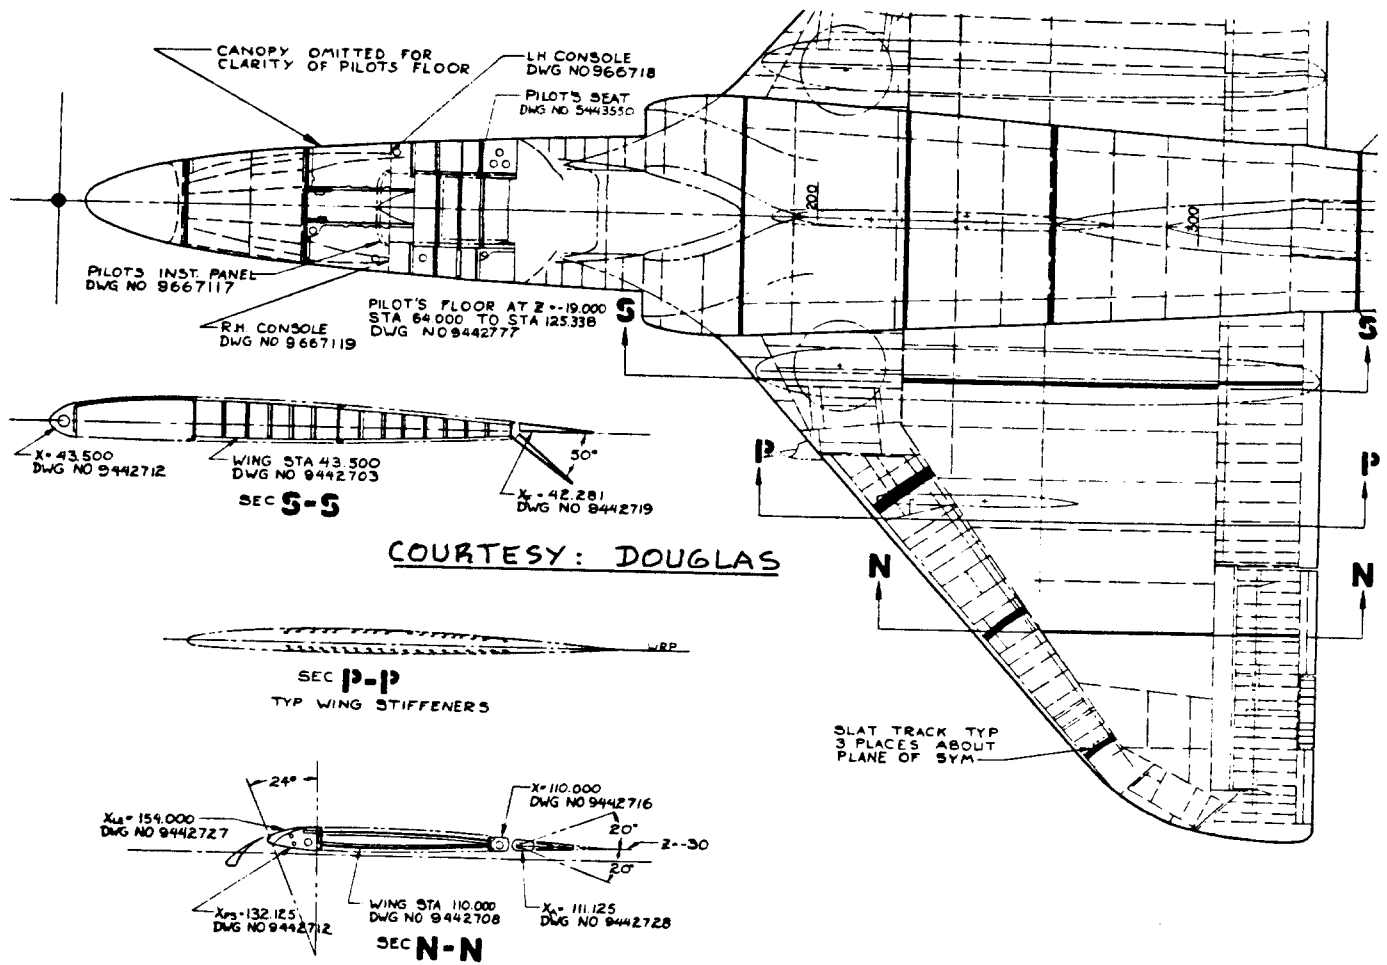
Wing Structural Arrangement Douglas A4D-2N
